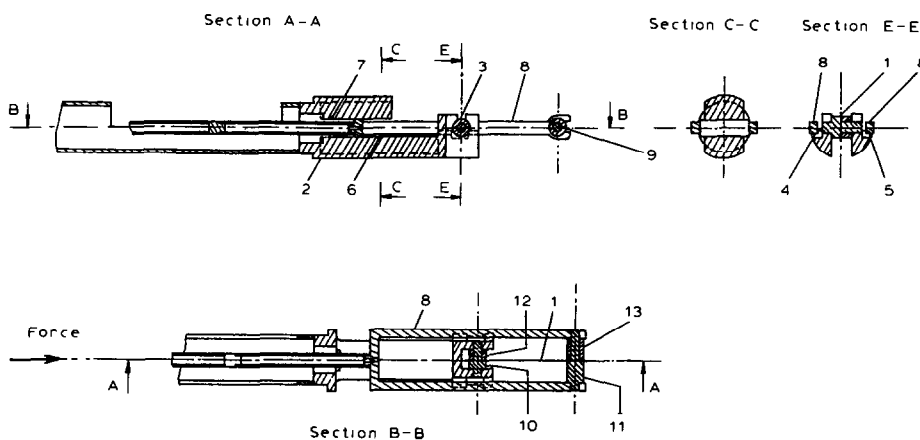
Description of the sample holder used for the thermal expansion measurements.
